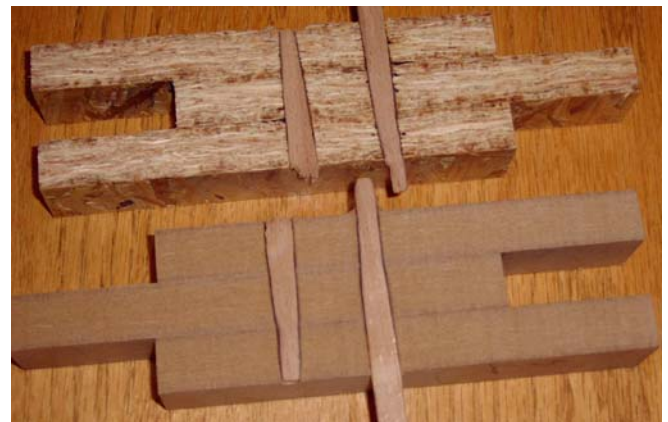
Sections of examples of specimens for stiffness testing composed of OSB or MDF panels joined by two dowels welded through them. Note, the dark thin interface between dowels and substrate indicating good welding
